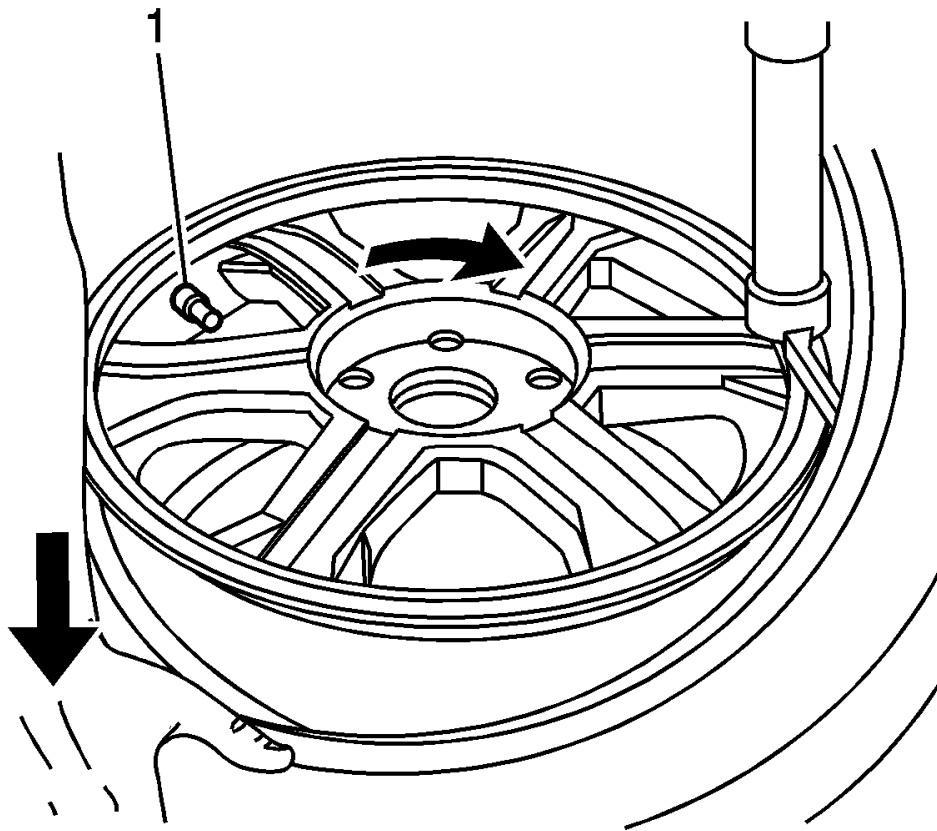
Ensure Valve Stem Is At 7 O'clock Position
